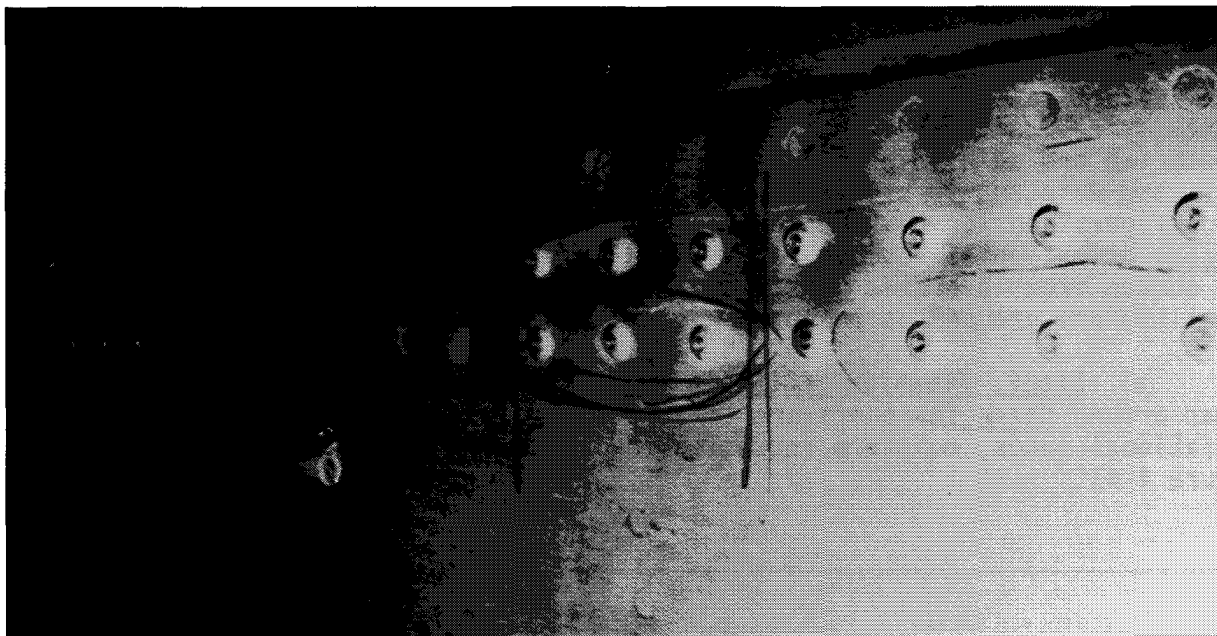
CRACK AND SKIN BULGING CAUSED BY CORROSION
